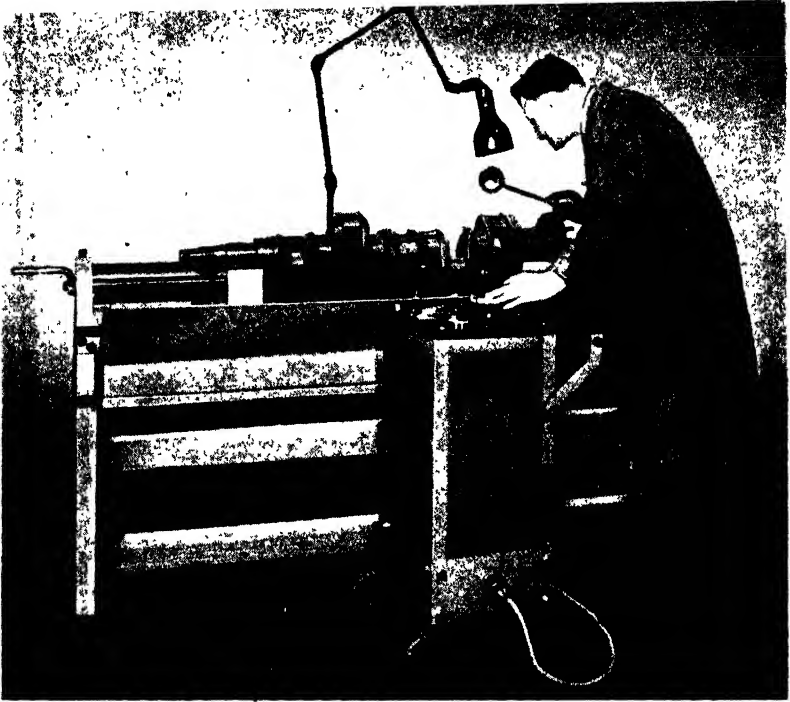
ILLUSTRATING USE OF STANDARD CRACK DETECTOR ON AUTOMOBILE CRANKSHAFT
